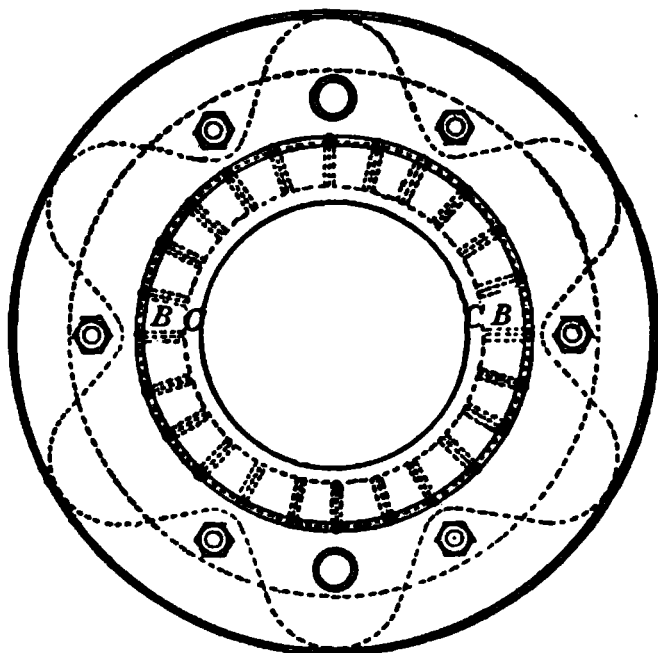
Plan of Mould employed in Fluid Compression of Steel.
